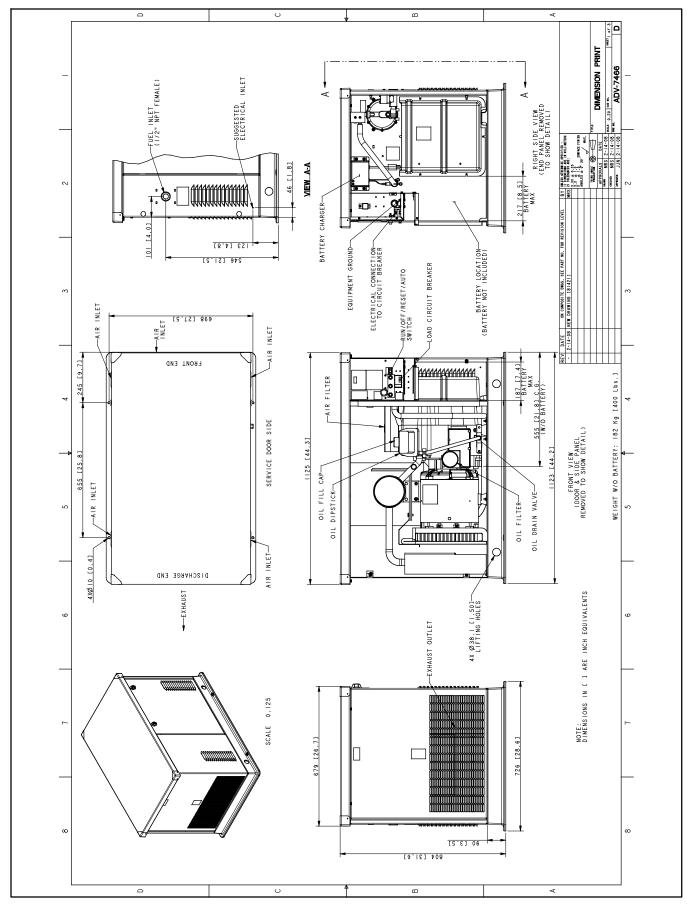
Generator Set Mounting Details and Dimensions, 8.5RES, 12RES, and 12TRES (3-phase), ADV-7466, Sheet 1
